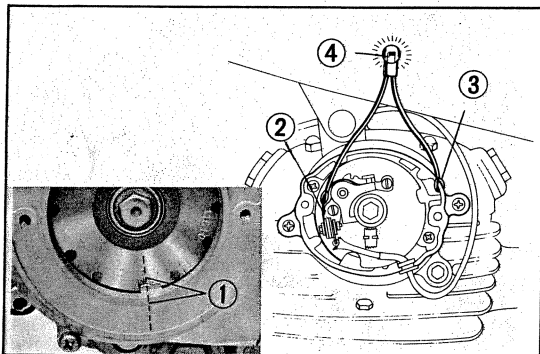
① "F" aligning mark ② Breaker arm spring
